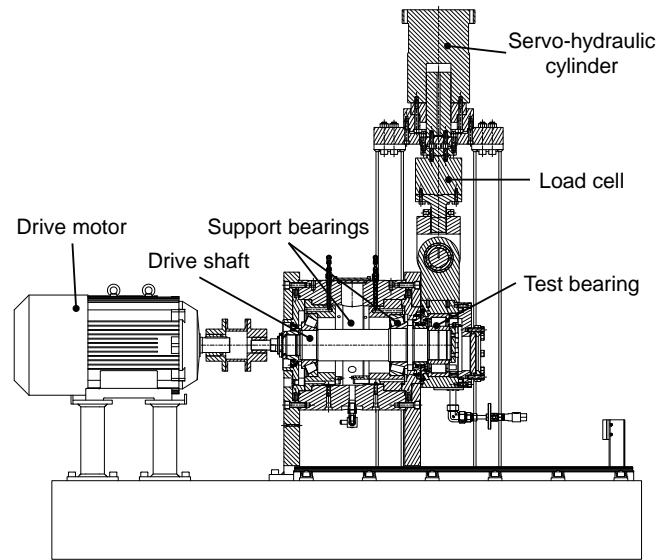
Dynamic radial bearing test rig with test bearing of type NU2330.
